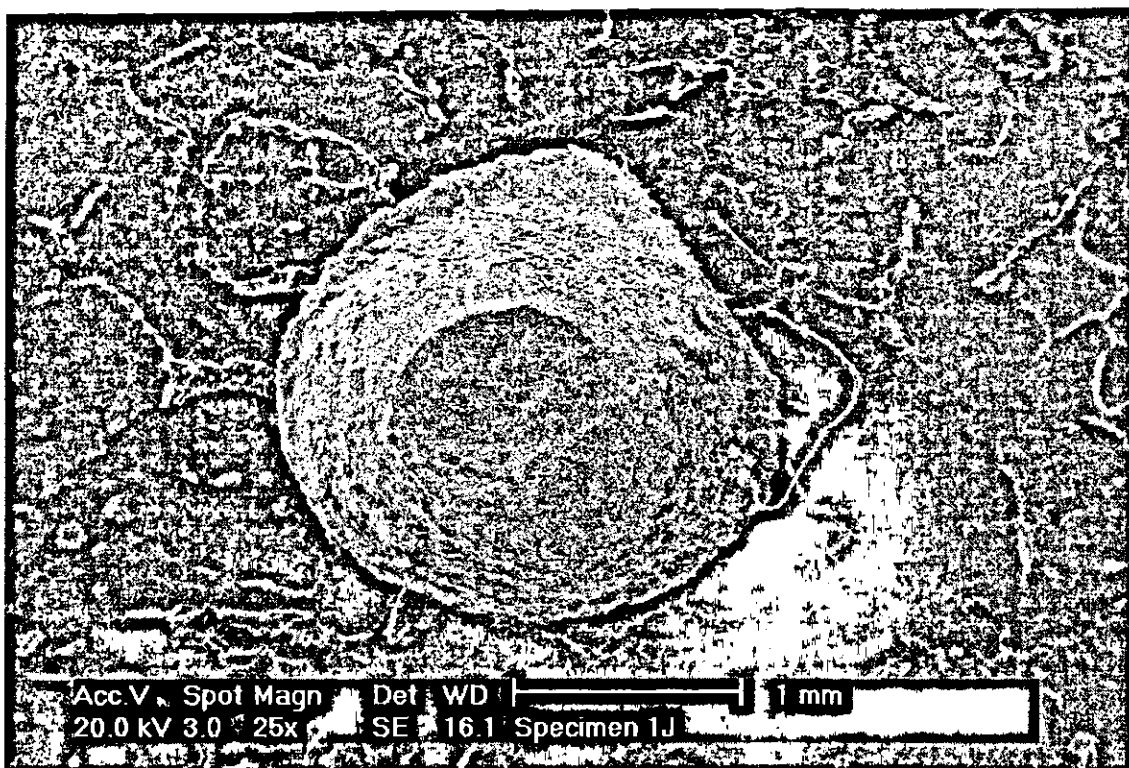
Fracture surface of Specimen 1J, 649°C, 681 hours.
